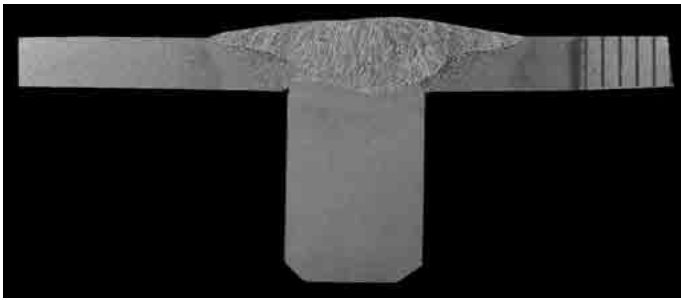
Macrostructure of spot welded sample no. 18
